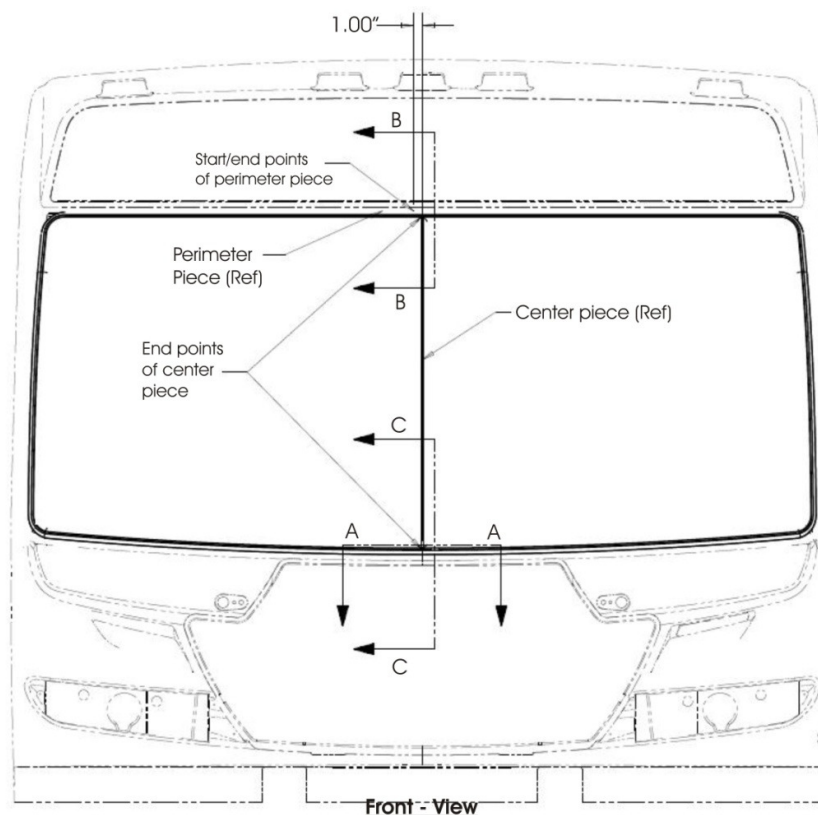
SHOWN VIEW OF WINDSHIELD ALONG WITH THE SEAL AND FILLER STRIP THAT REQUIRES TO BE REMOVED TO ALLOW REMOVING WINDSHIELDS.
